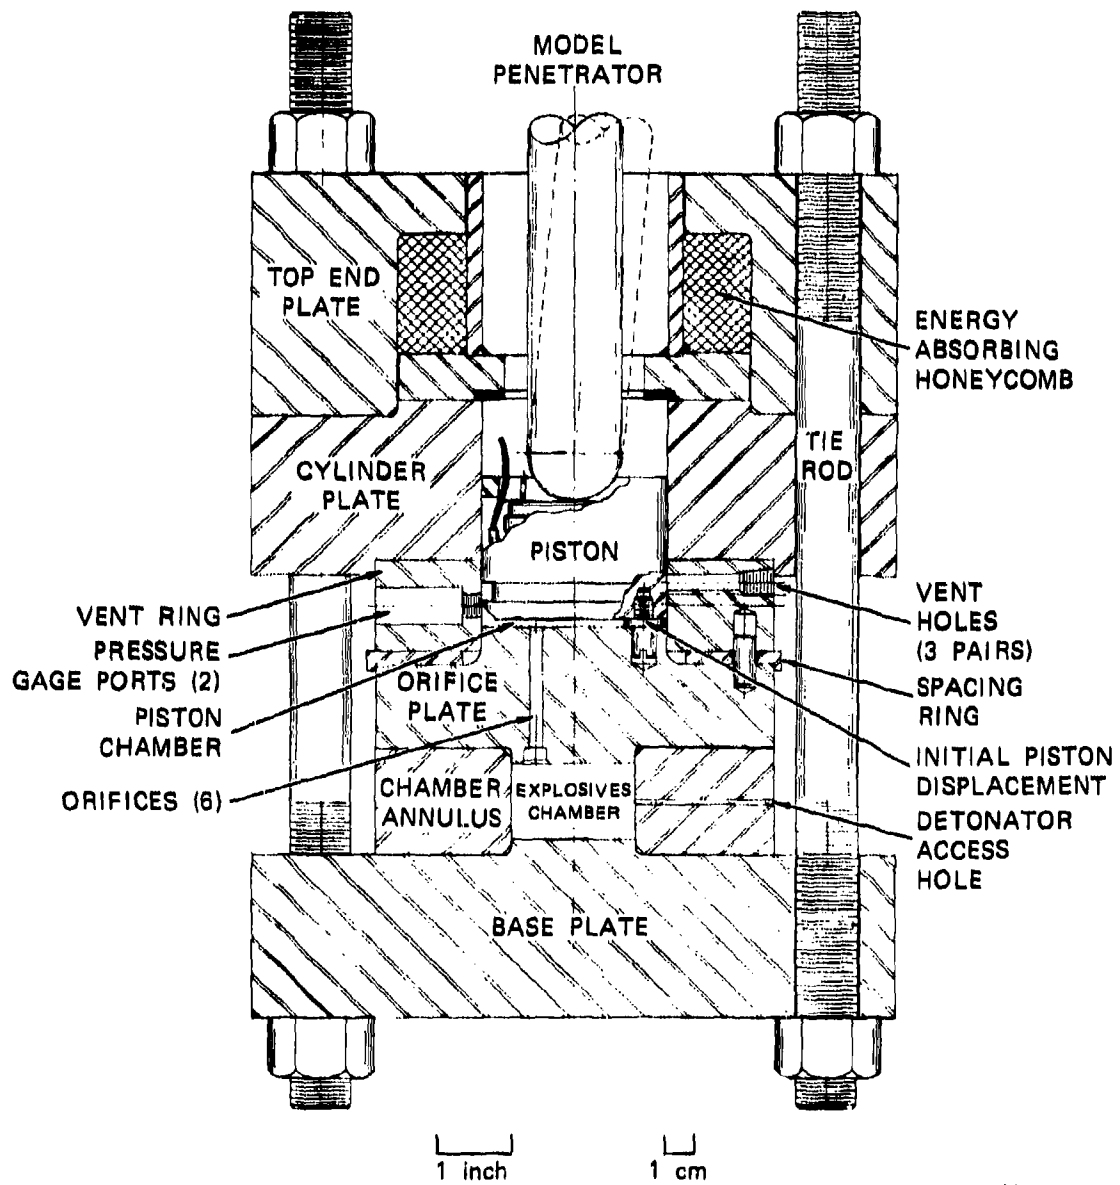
ASSEMBLY DRAWING OF TEST FIXTURE FOR SIMULATING IMPACT LOADS
